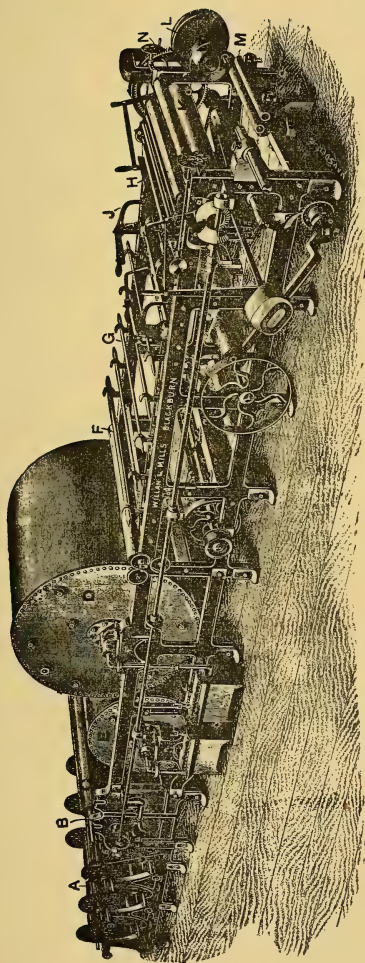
THE IMPROVED "SLASHER" SIZING MACHINE.
